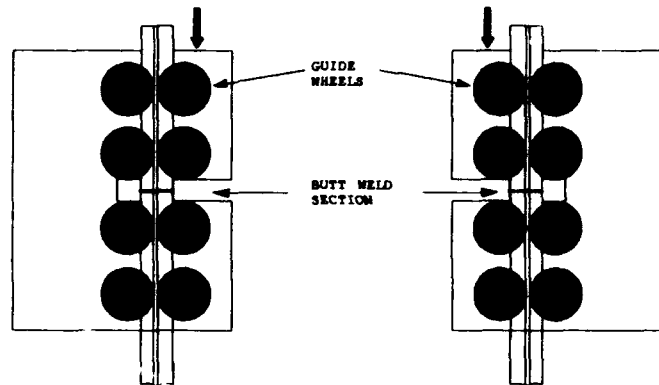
The drive wheels push the longitudinal truss members into the butt welding section. The drive wheels stop and hold the longitudinal members during the welding process.
